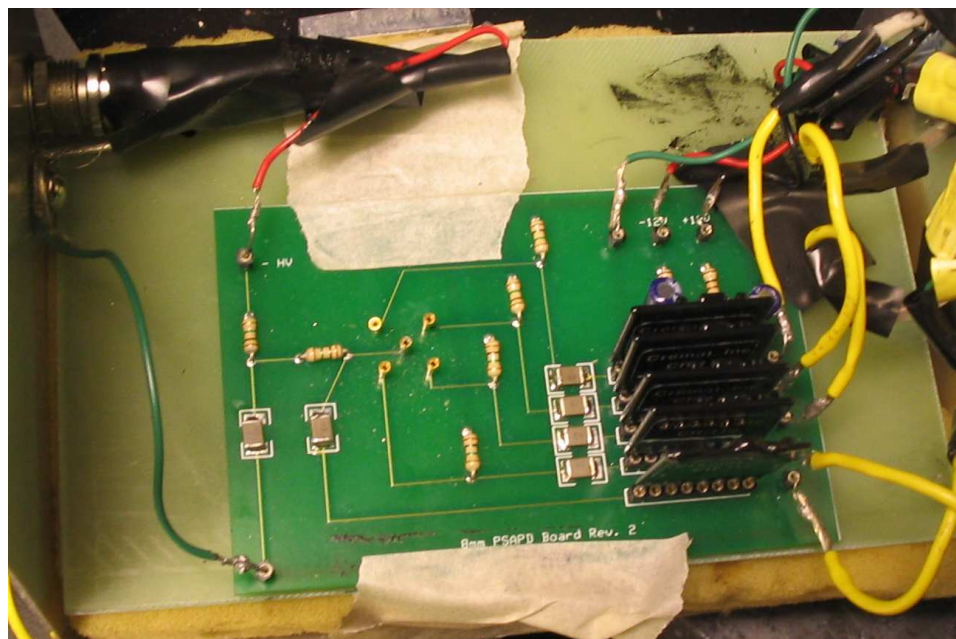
A picture of the acquisition board with which all of the single chip designs were tested.
